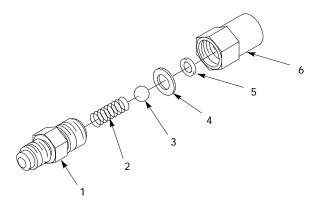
DOUBLE CHECK VALVE ASSEMBLY
